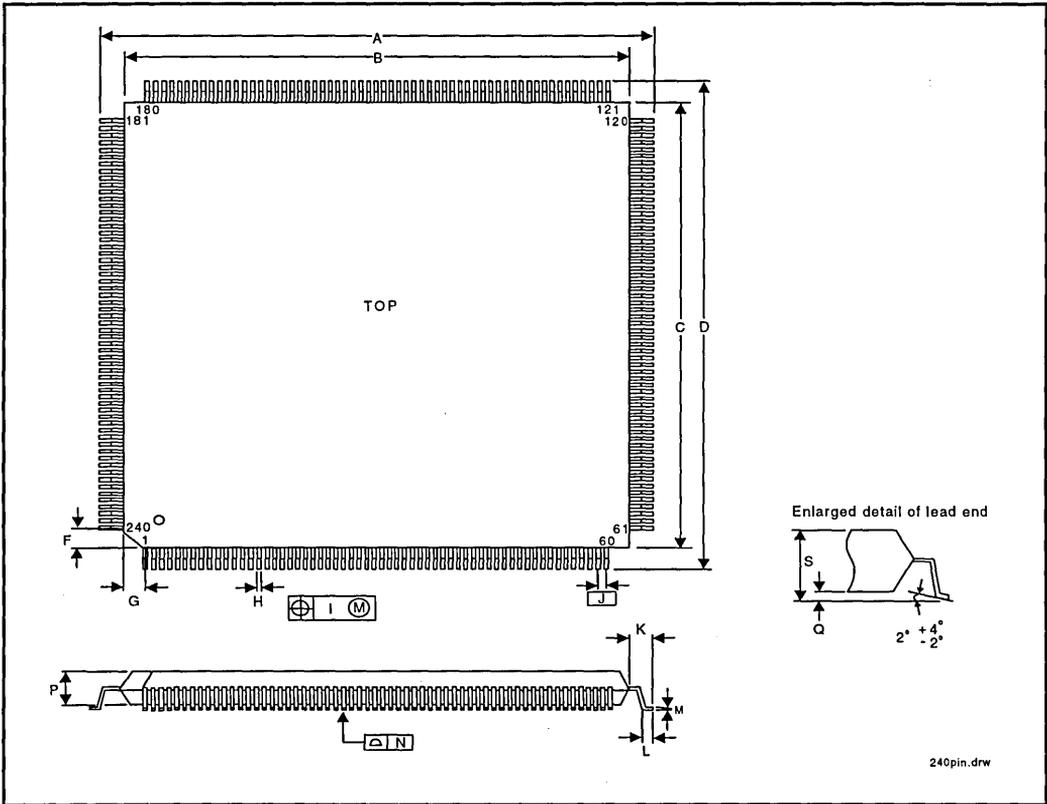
DP Package Physical Dimensions (240-Pin QFP)
